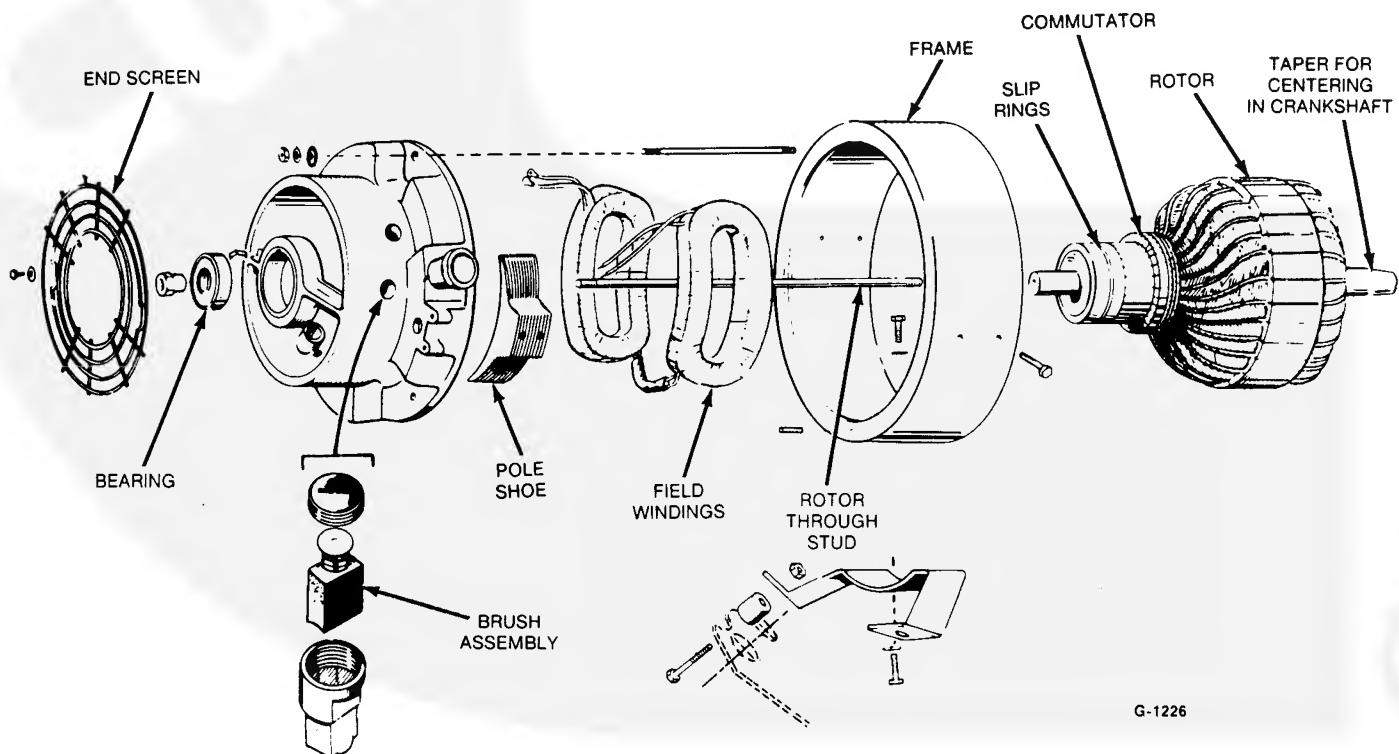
RV GENERATOR DISASSEMBLED
